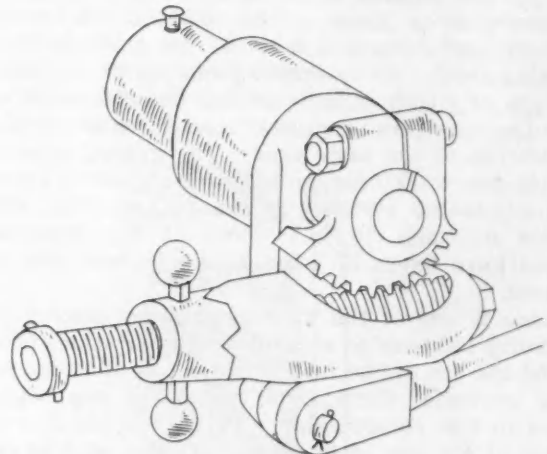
A FORM OF BRAKE ADJUSTMENT IN WHICH THE ANGULARITY OF THE CAMSHAFT IS CHANGED
